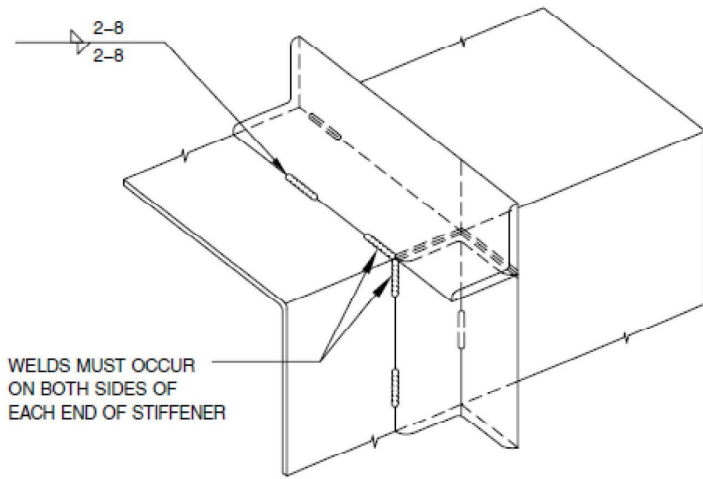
Fixed Reinforcement Stiffeners (Framed - Heel Down)
